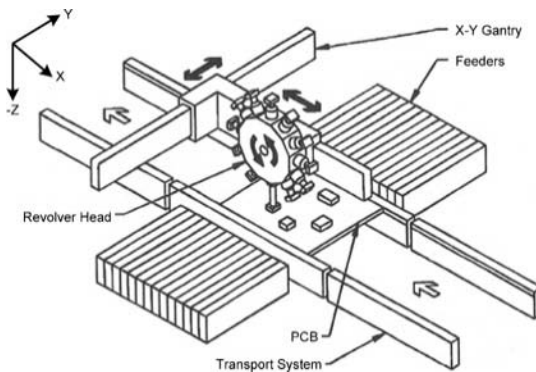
Single-gantry collect-and-place machine with a rotary placement head⁵⁹
